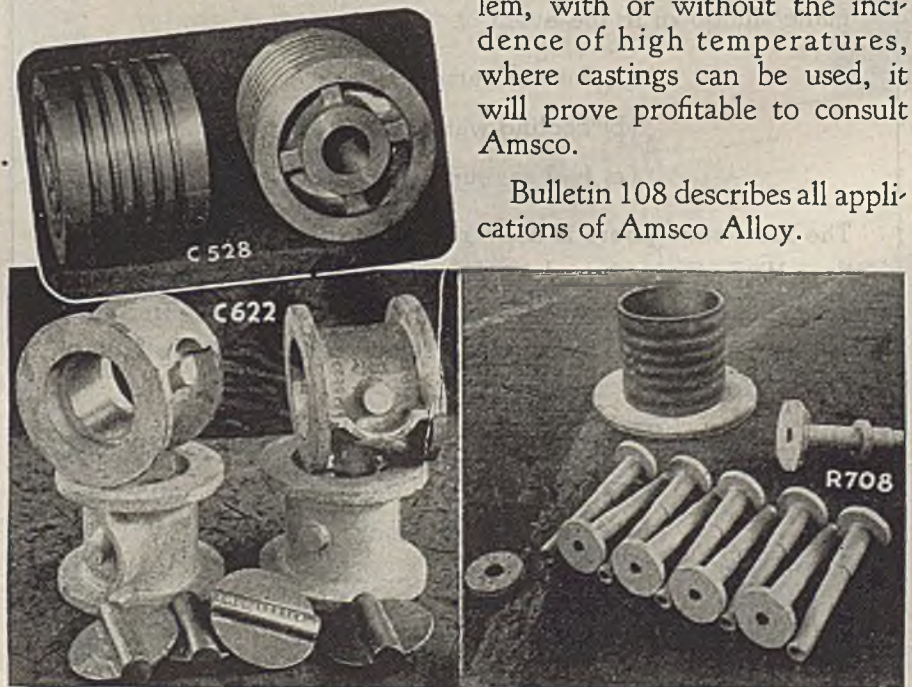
shows pistons of Amsco Alloy F-8, for resisting corrosion in the hot oil pumps of an Illinois refinery. This alloy, which contains 20-22% chromium and 8-10% nickel, is primarily employed to withstand erosion, pitting, etc., from the corrosive action of acids, acid solutions and gases; and is also serviceable under temperatures up to 1600° F.
